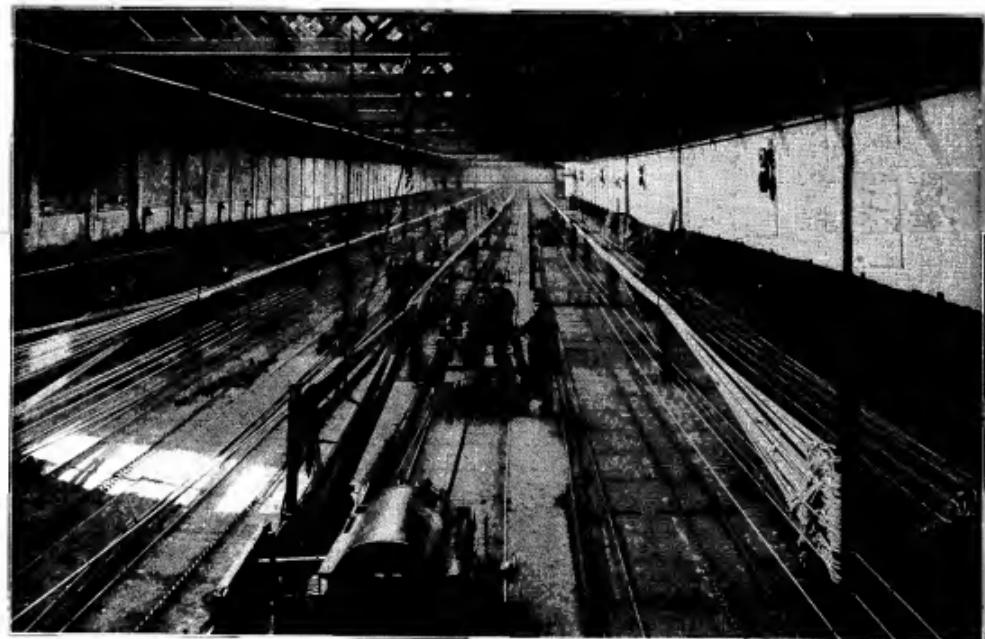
ROPE-MAKING, POTTINGER MILL.
